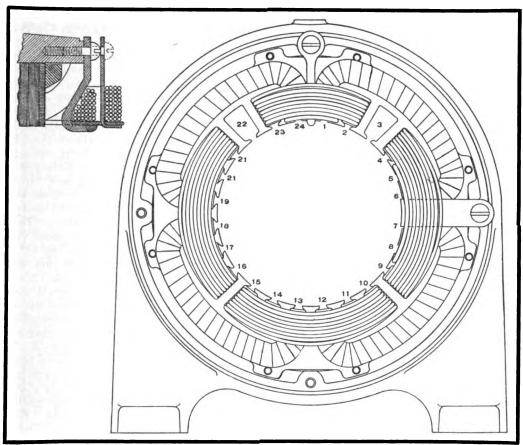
STATOR WINDING FOR SINGLE-PHASE MOTOR. STARTING COILS COMPLETED AND TAPED; RUNNING COILS NEARLY FINISHED
